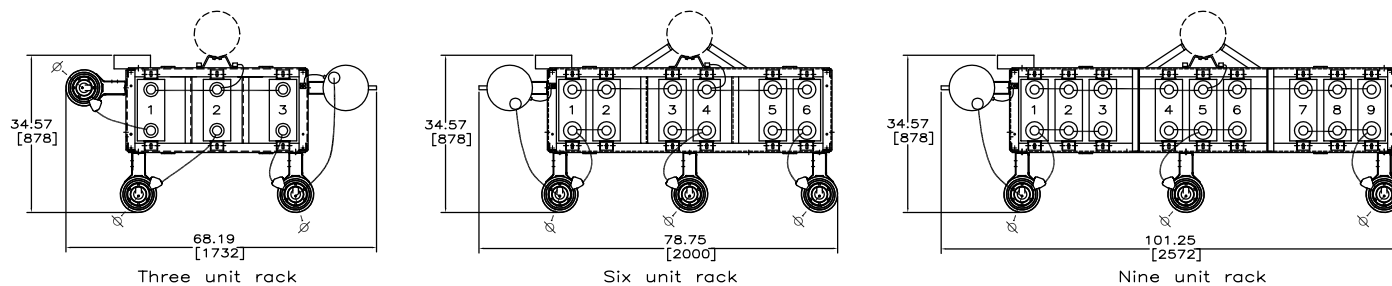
Capacitor rack assemblies 110, 125 and 150 kV BIL with 50, 100, 150, 200, 300, 400, 500, and 600 kvar units
